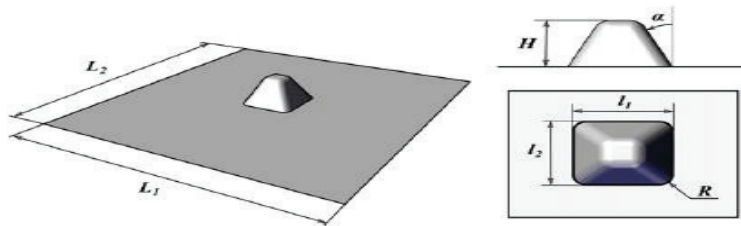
Dimensional parameters of blank and pyramidal workpiece.
